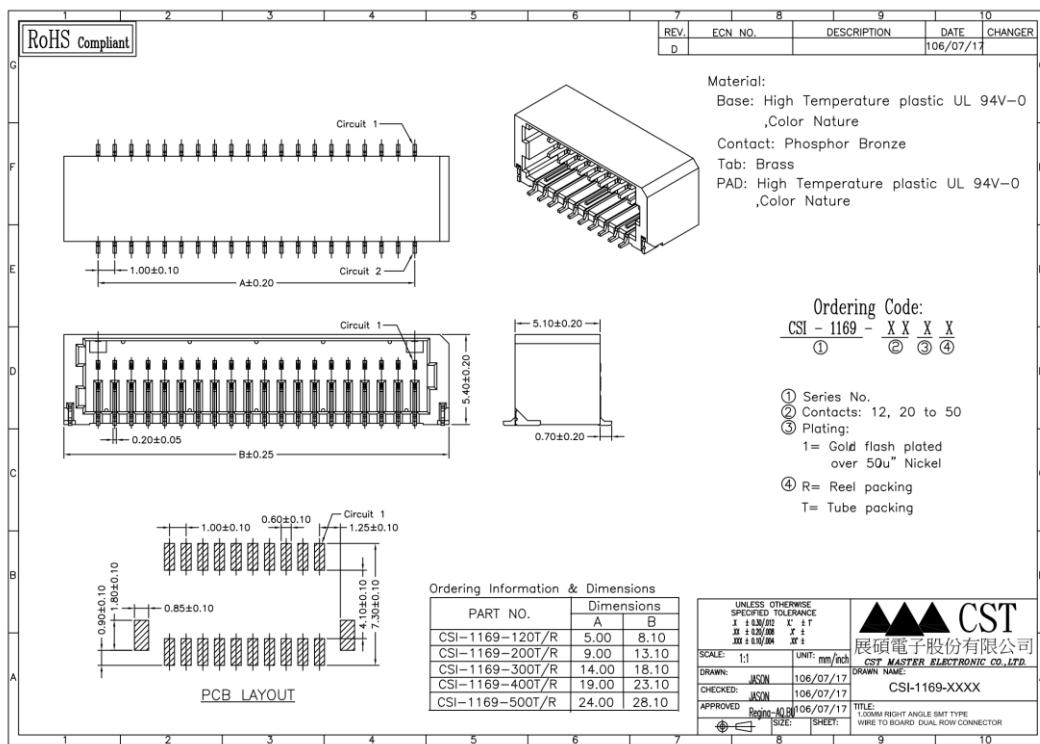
Wire to Board SMD 2*10P 90D Connector Drawing (CN1/CN3)
